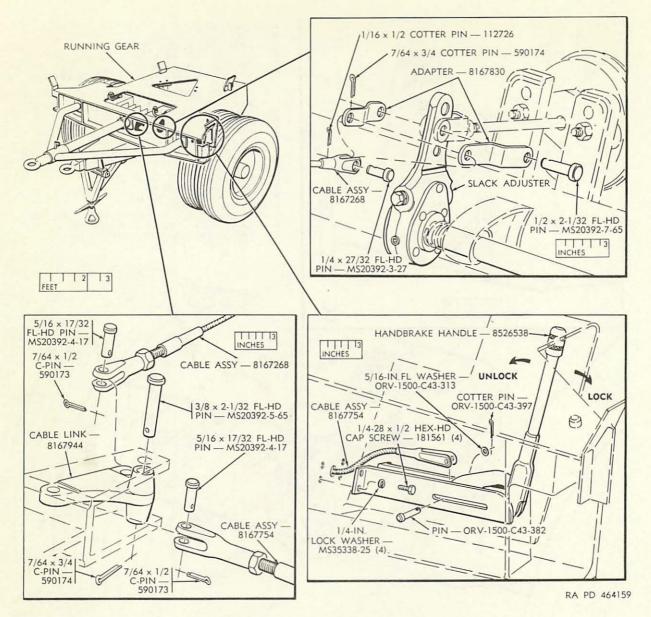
Handbrake handle, adapter, and cable assemblies – removal and installation – typical.
